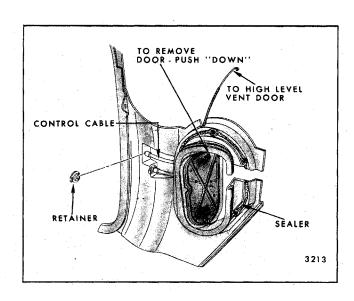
Shroud Side Finishing Panel Sealing - F and X Styles Shown - H Styles Similar
